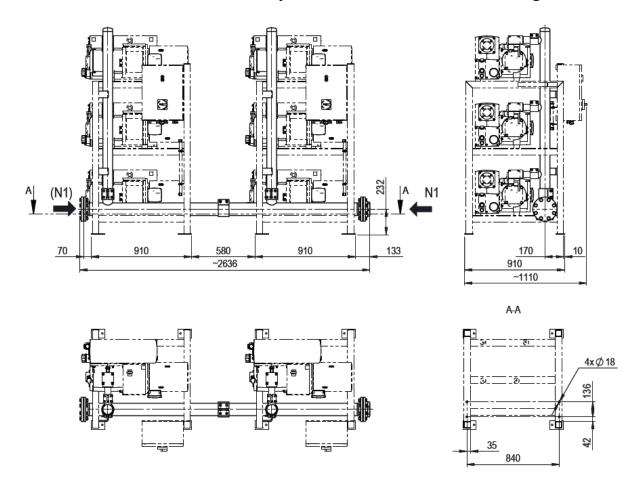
Dimensions vacuum system TRIPLEX VRD (connecting line)
